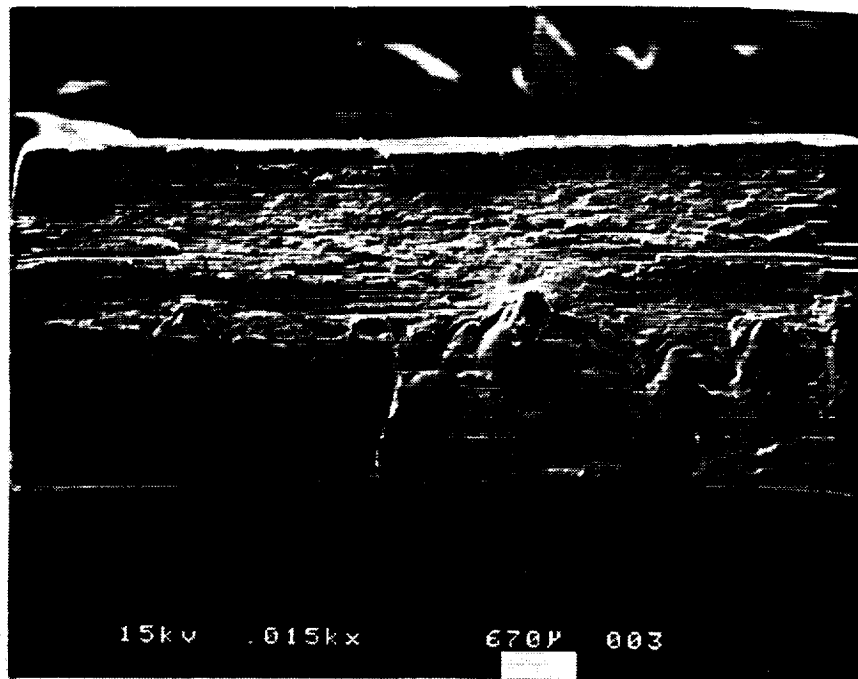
Scanning Electron Micrographs of Fracture Surface of Partial Penetration Welds of 2090-T83 After Tensile Testing.
